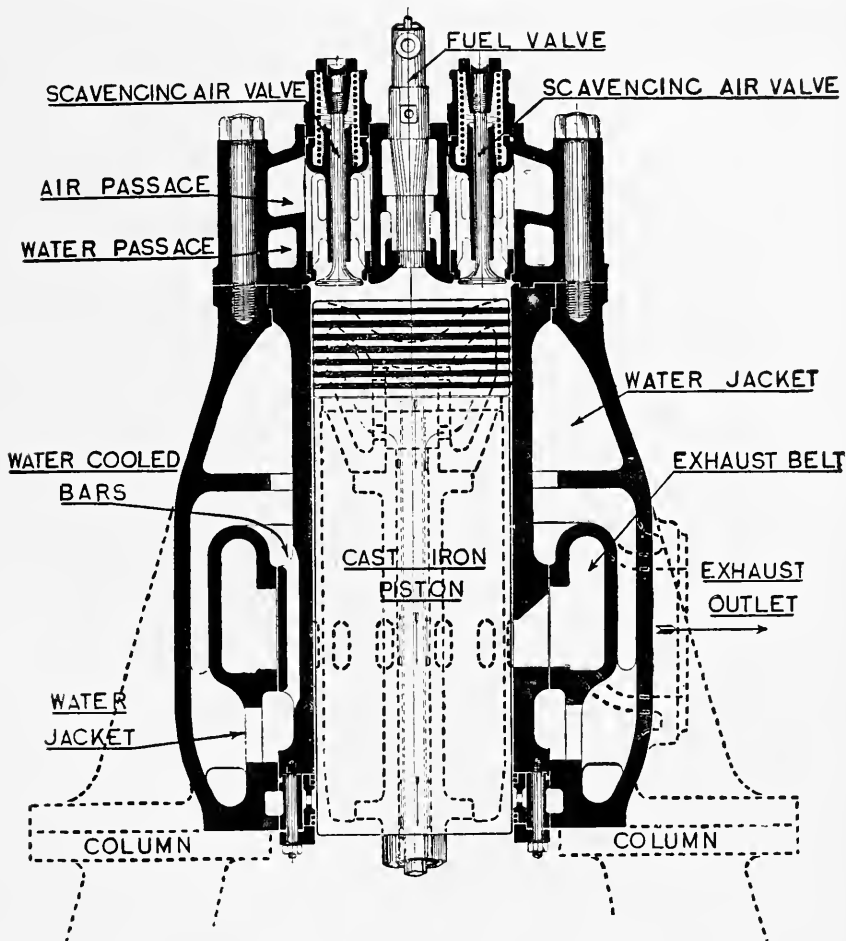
Section of Cylinder of Westgarth-Carel Oil Engine.
